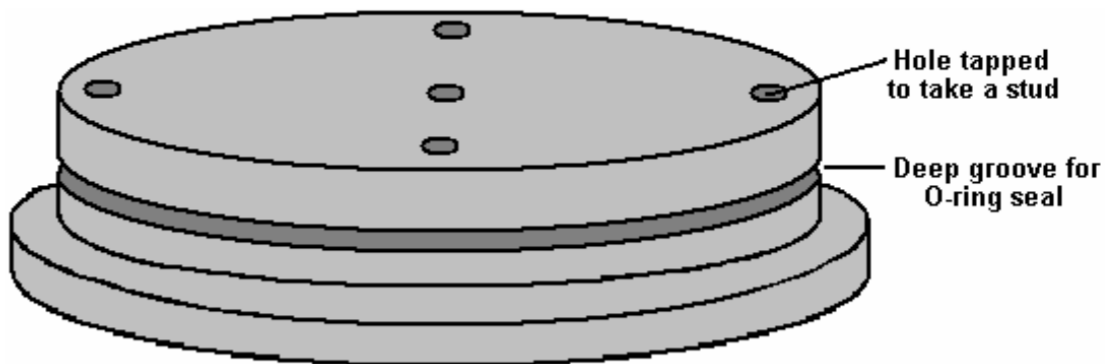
A piece of plastic is shaped as a disc, whose size is matched exactly to the piece of clear acrylic tube, used for the body of the housing.
